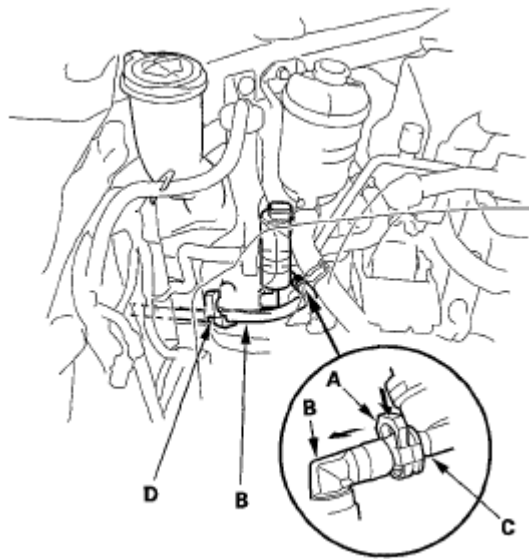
Identifying Retainer, Headlight Washer Tube, Nozzle And Washer Motor
